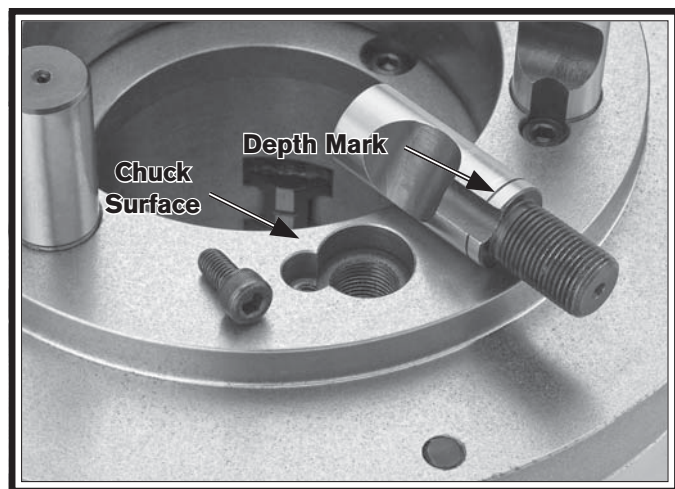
Identifying chuck camlock studs and locking cap screws.
